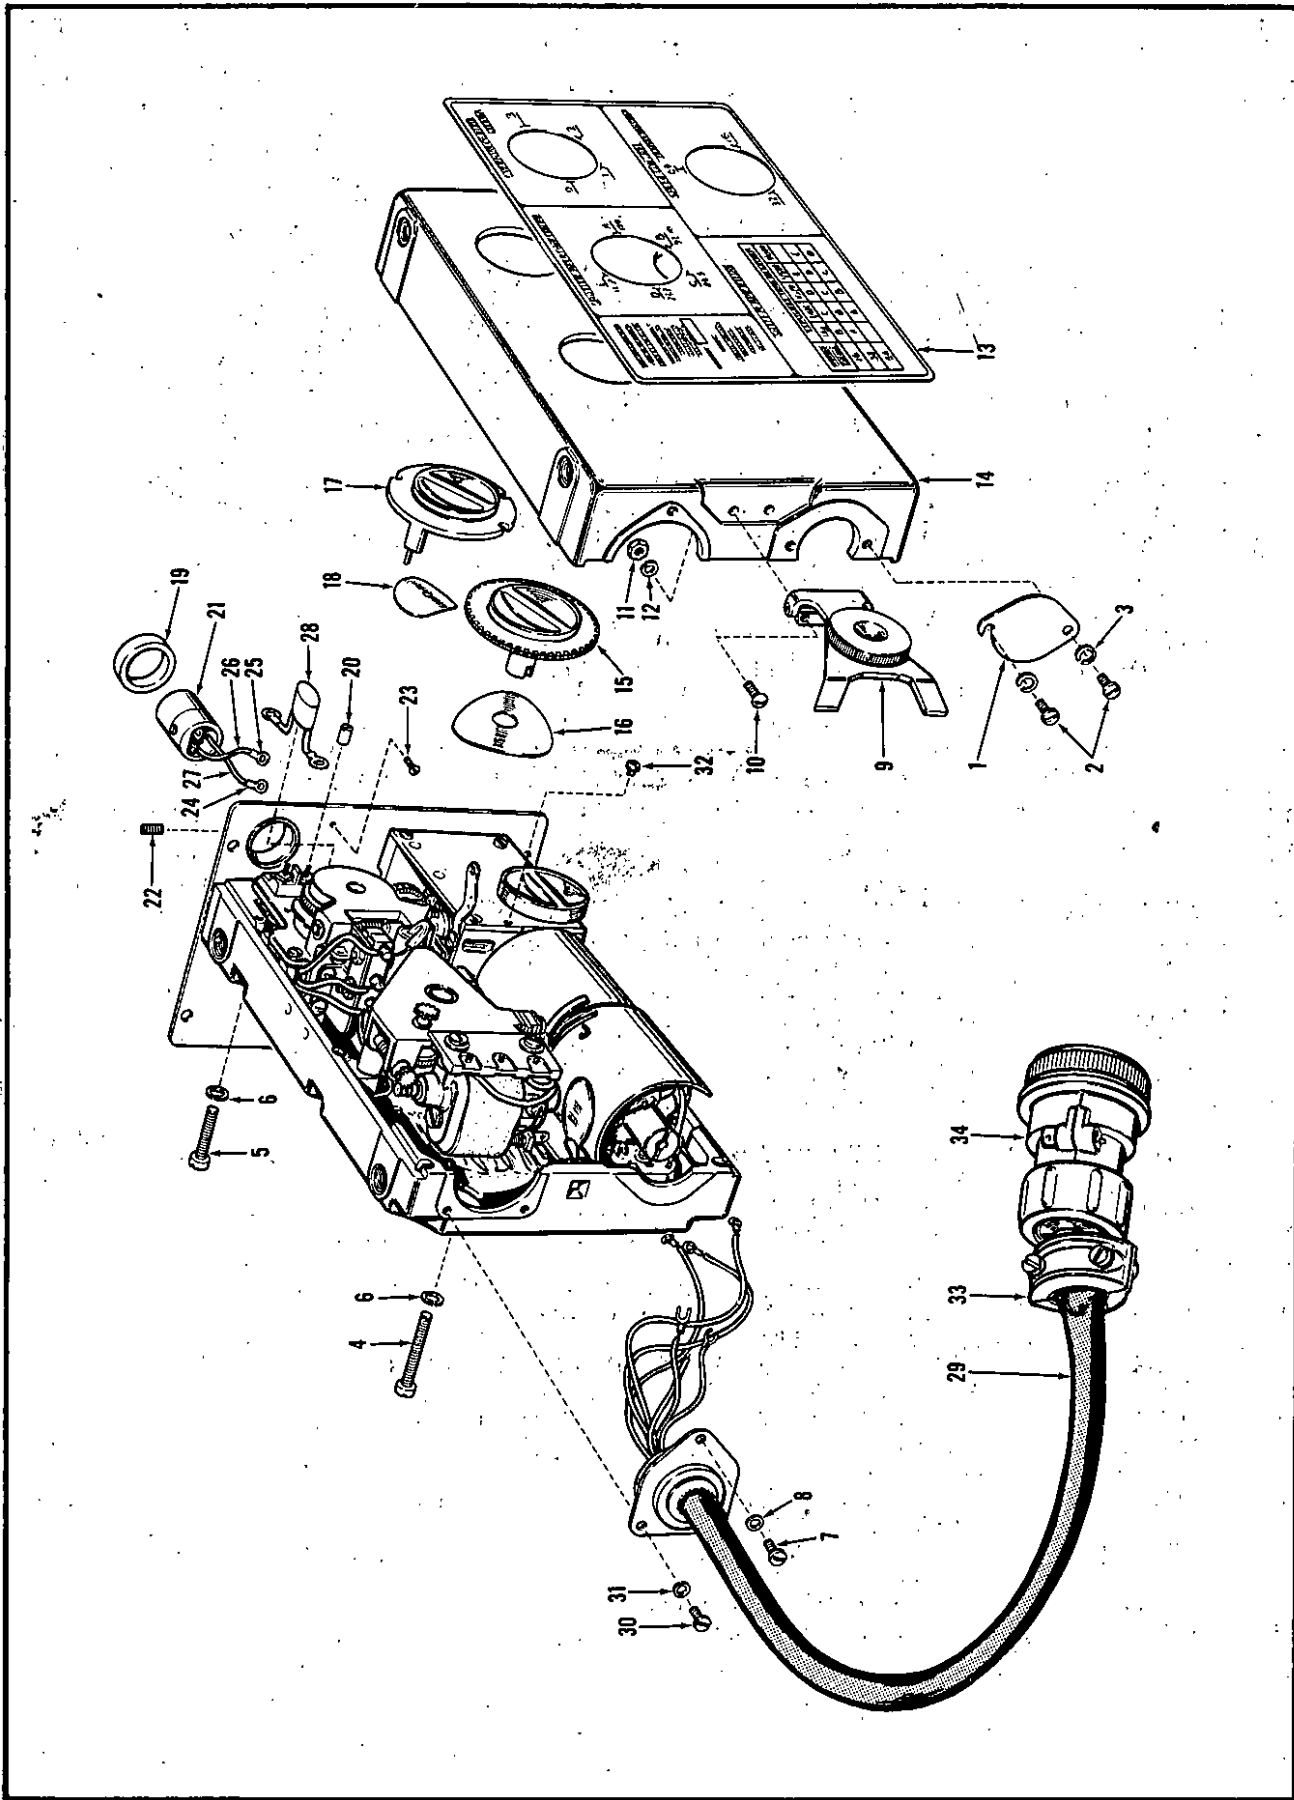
(Sheet 2 of 4) Exploded View of Motion Picture Camera
